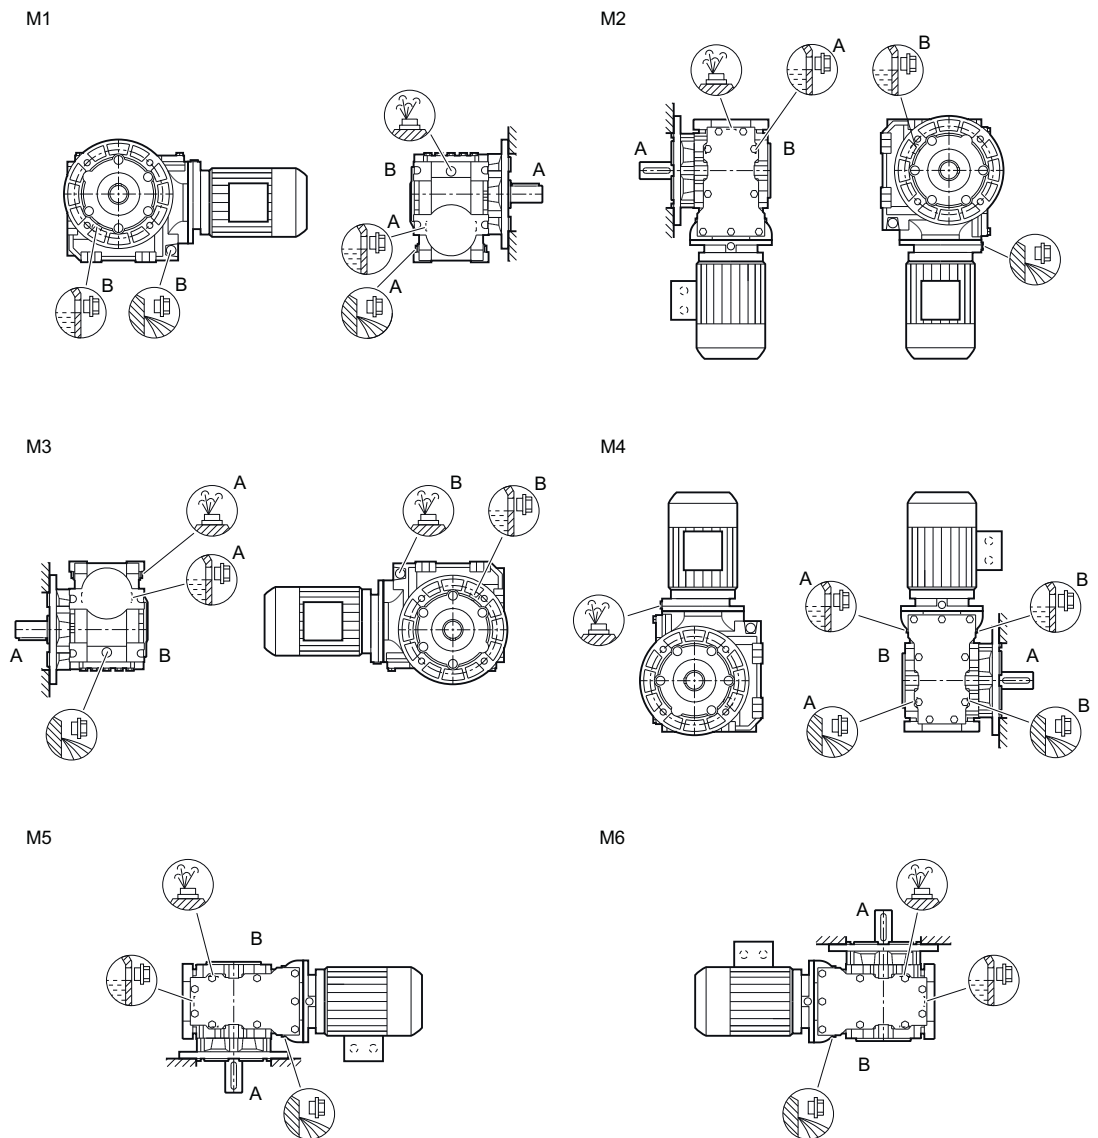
Mounting positions for helical worm gearbox CF flange-mounted design and CAZ housing flange, size 39A
